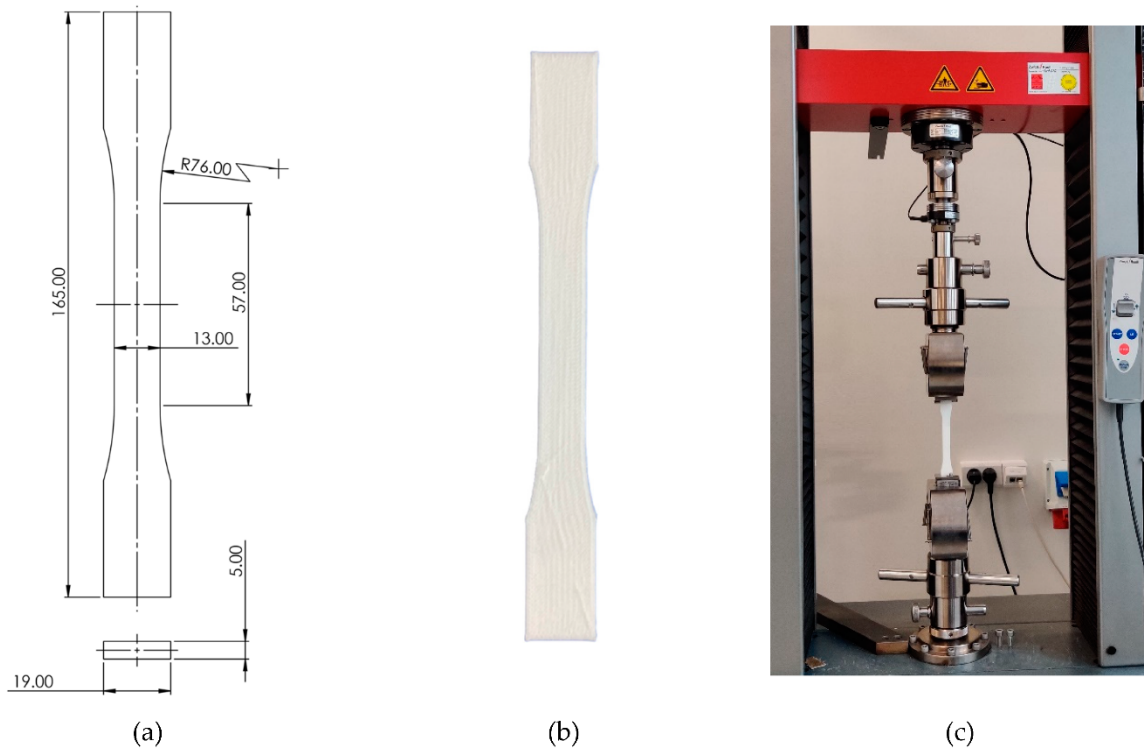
Uniaxial tensile test of PLA printed samples: (a) ASTM D638 dog-bone, (b) 3D printed dog-bone, (c) tensile testing machine.
